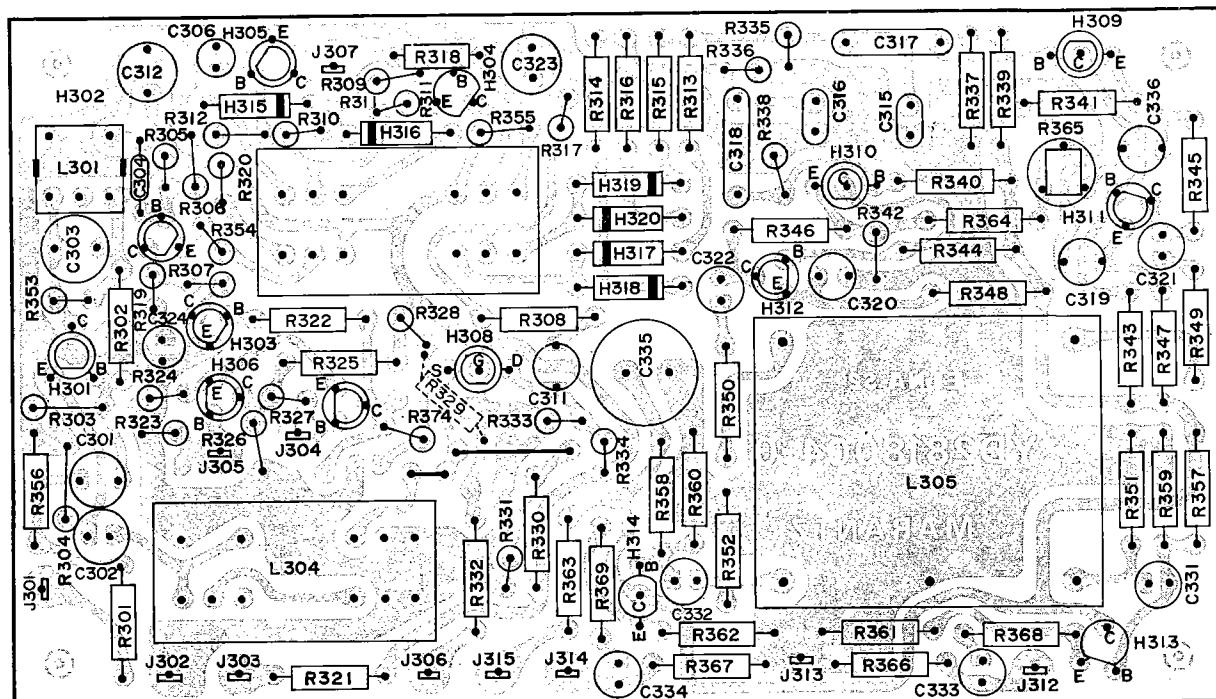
MPX Stereo Decoding Amplifier Assembly P300 Component Locations
